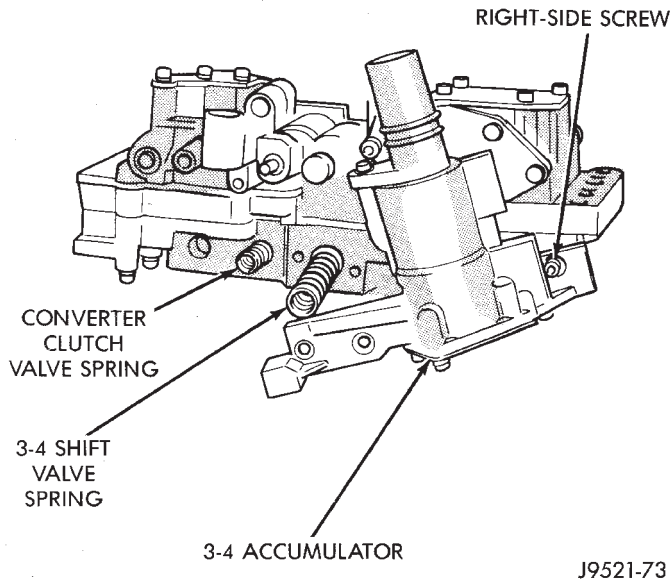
Installing Converter Clutch And 3-4 Shift Valve Springs
